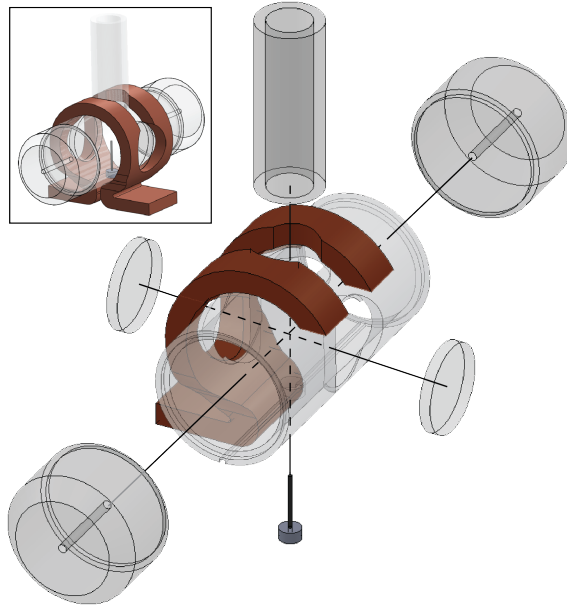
Exploded diagram of the gas cell assembly, with coil partially hidden to expose features on the polycarbonate body. The target pin is glued into a socket at the bottom of the body. Once the pin is secure, the body is inserted into the coil, and the remaining gas cell pieces are added. Inset: a completed assembly.
